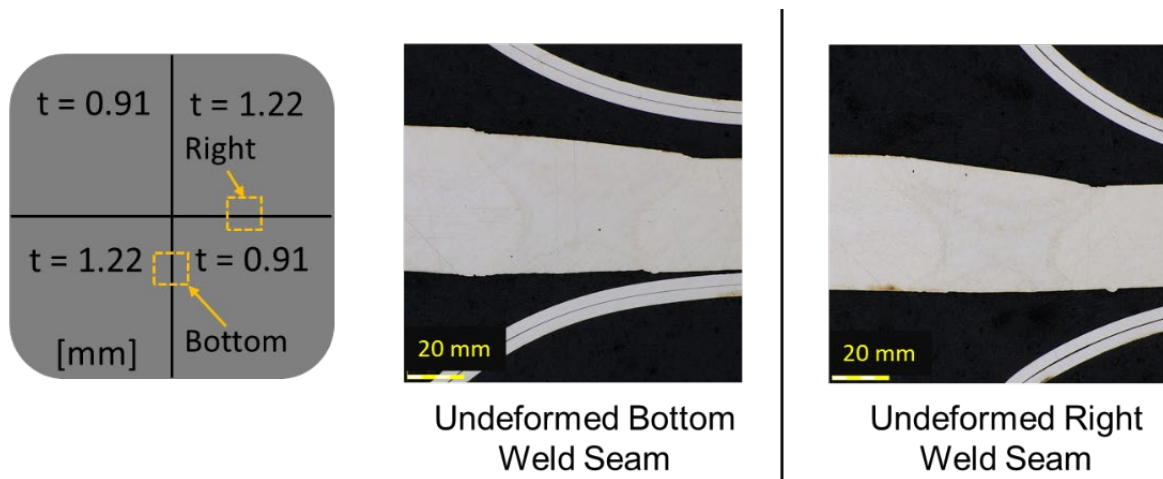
Orientation of tensile specimens along weld seams on quilted blank.
